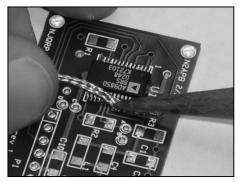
Remove solder bridges from closely-spaced leads using SolderSponge, Solder-Wick or SolderSucker. The IC can take a fair amount of abuse, so don't worry too much about applying too much heat.
